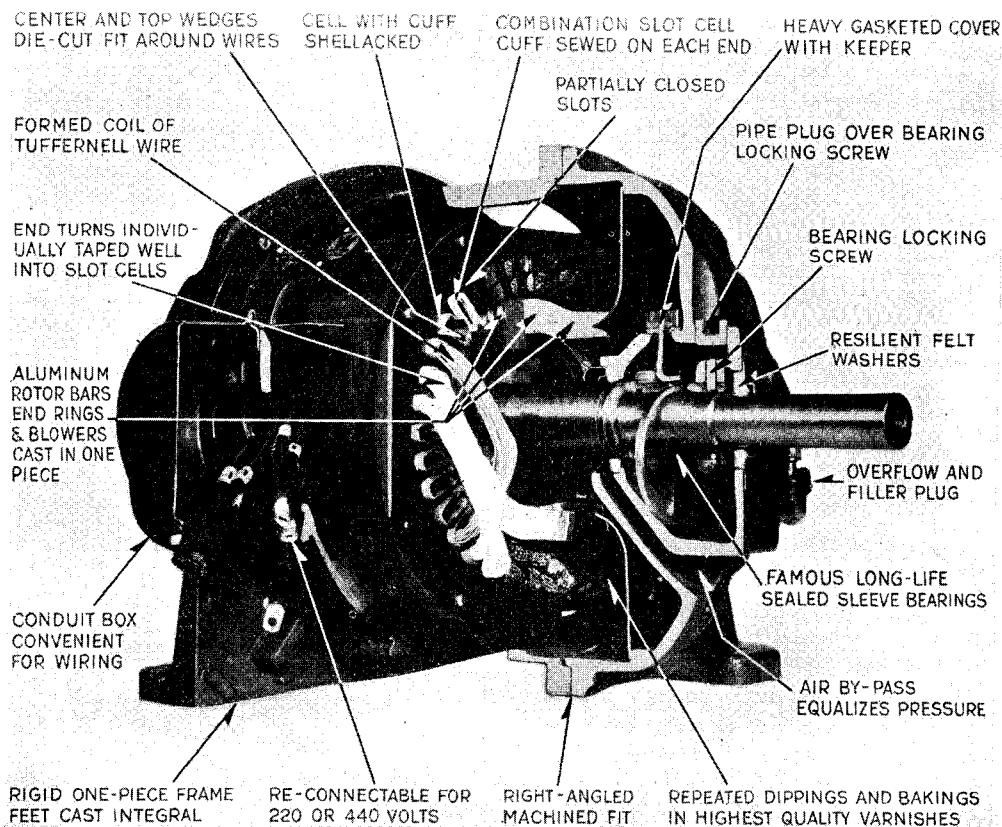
5 HORSEPOWER 1740 RPM TYPE CS SQUIRREL-CAGE MOTOR WITH SEALED SLEEVE BEARINGS. ILLUSTRATING SOME OF THE FEATURES WHICH MAKE FOR LONG LIFE.
